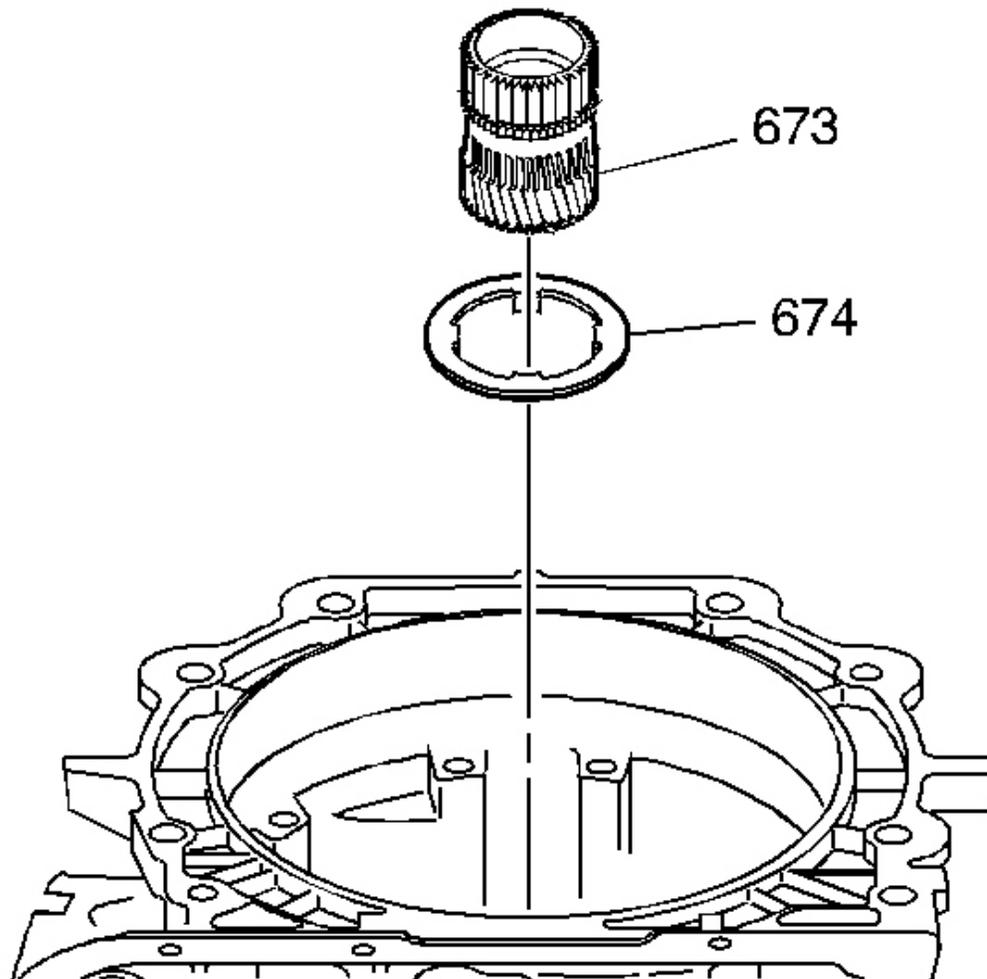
Reaction Sun Gear & And The Thrust Washer
